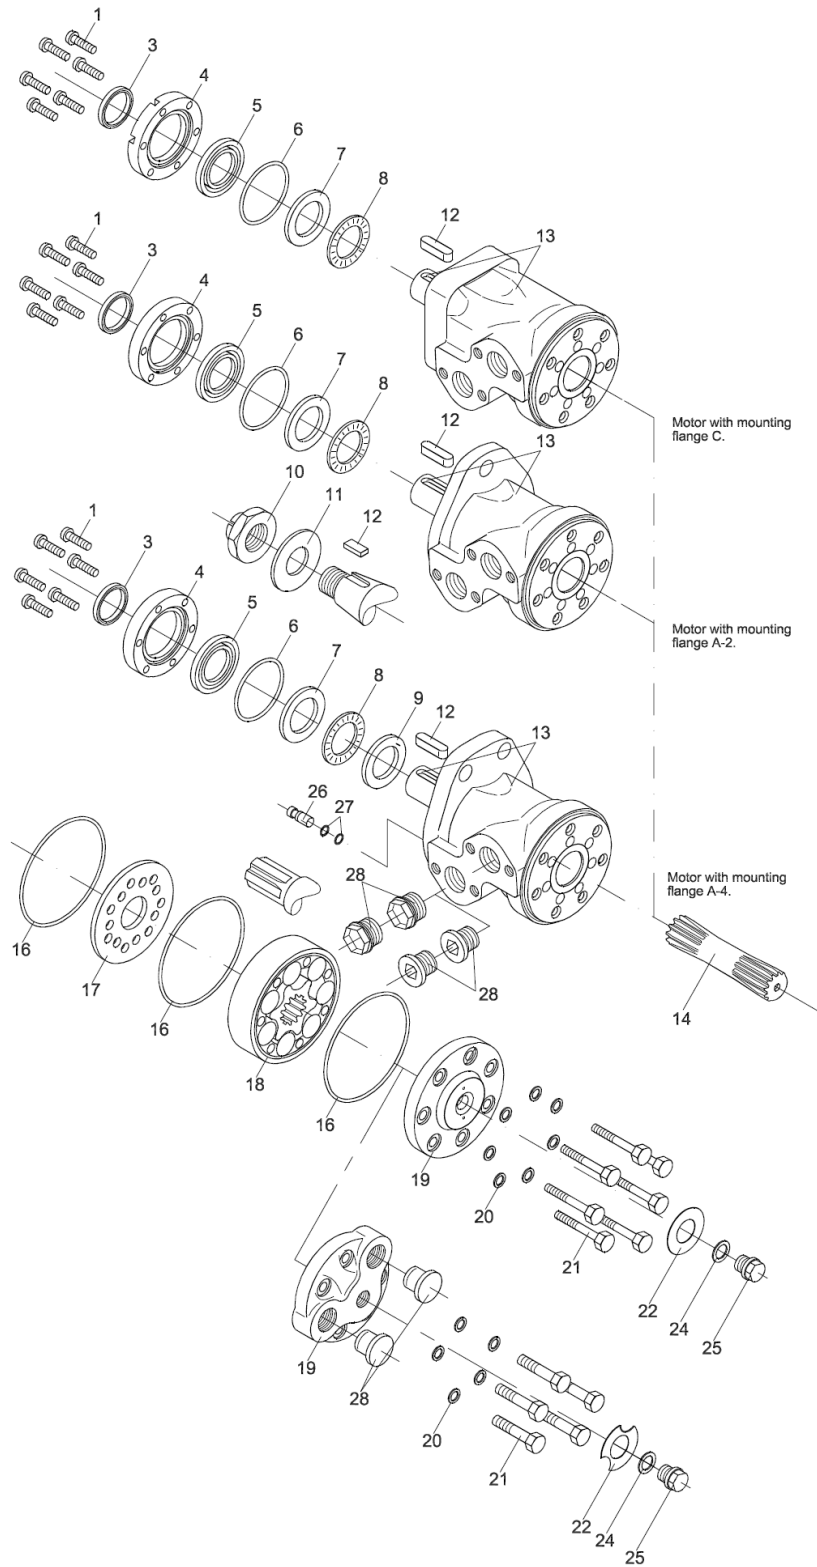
Exploded view OMR and OMR C, metric version Series 5 with separate spigot flange
